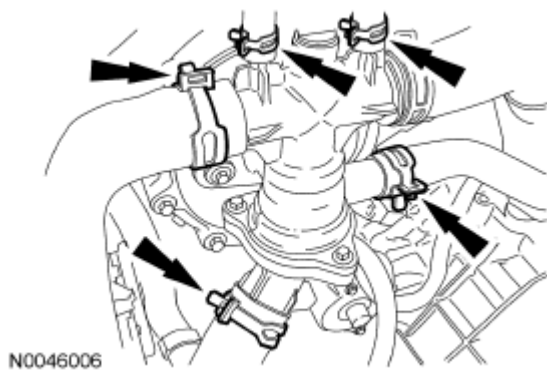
Locating Coolant Hoses From Thermostat Housing
